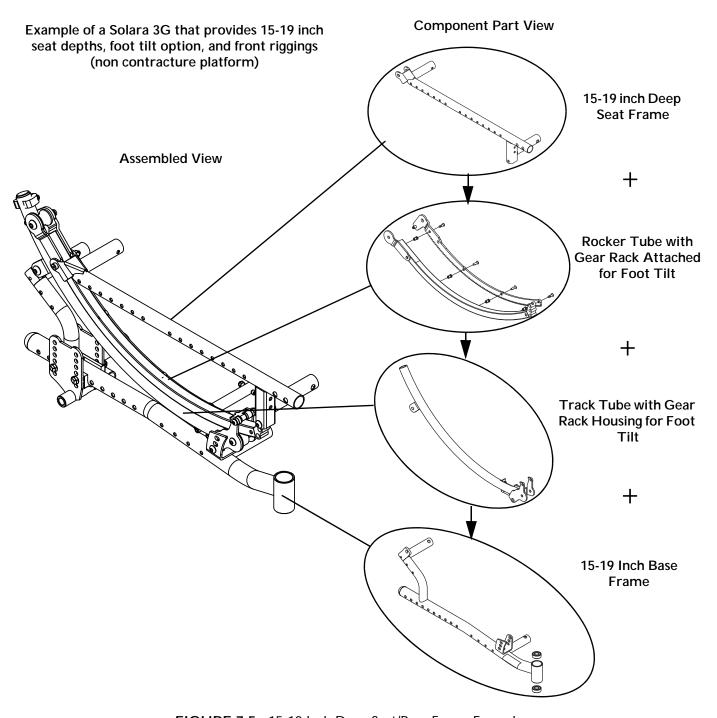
15-19 Inch Deep Seat/Base Frame Example
